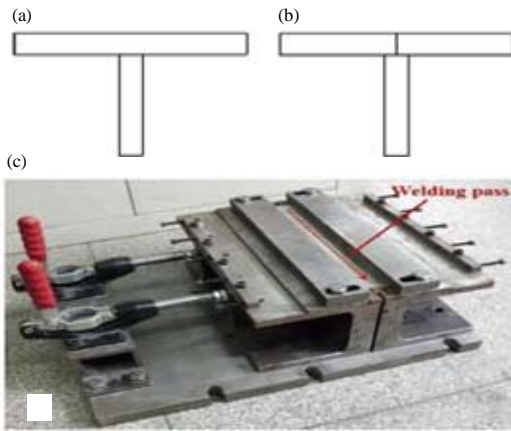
a) T-lap; b) T-Butt-lap joints and c) Special clamping fixture (Zhao *et al.*, 2014)
